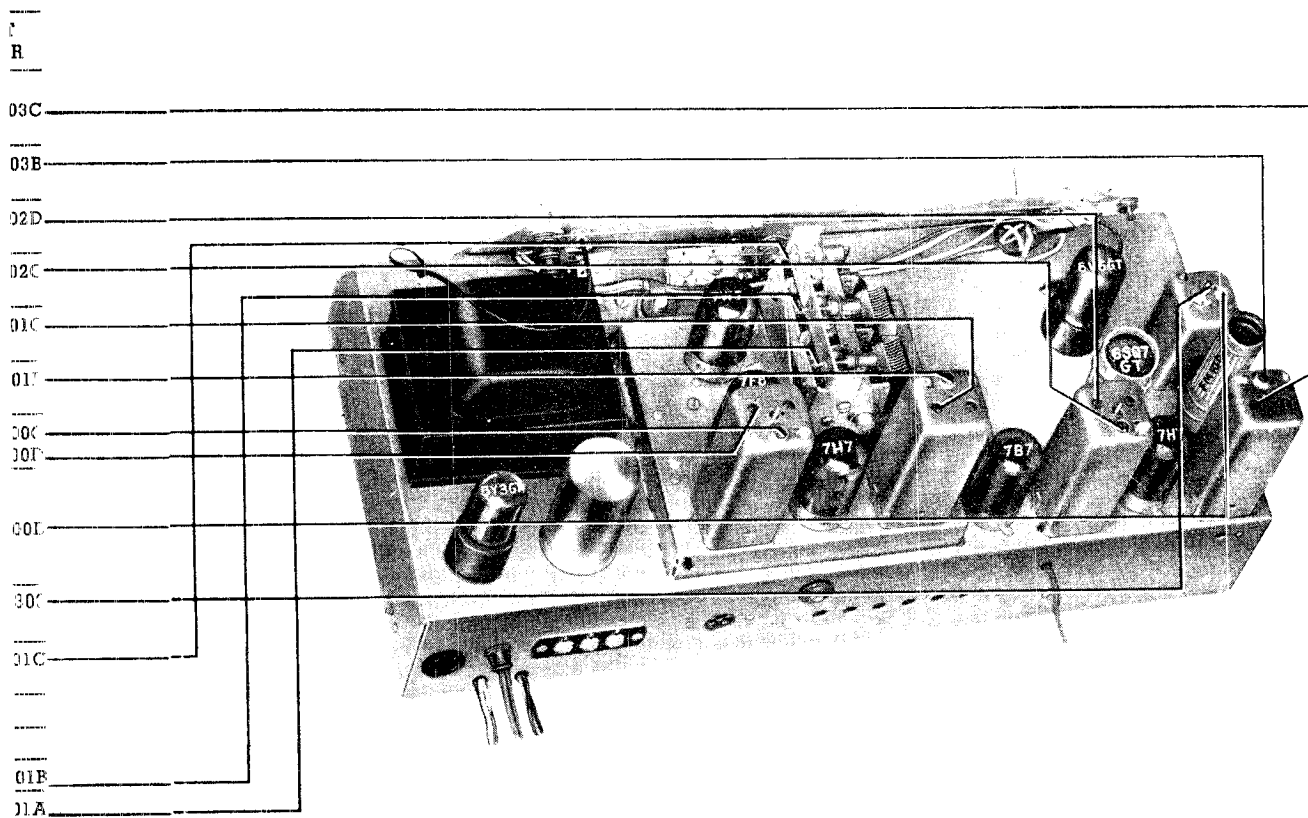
CHASSIS VIEW, SHOWING FM TRIMMER LOCATIONS.
